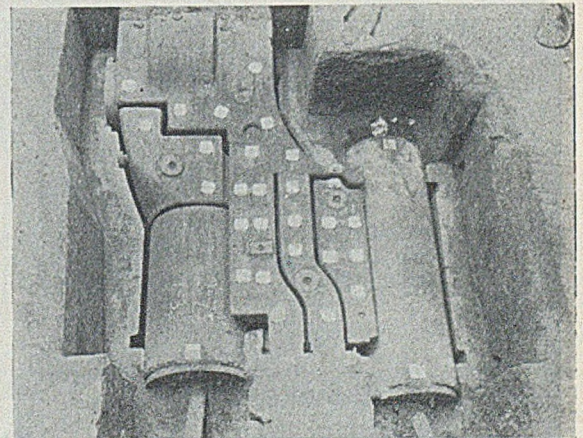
Another View from above the Cylinder Mould after All Cores have been Assembled.
